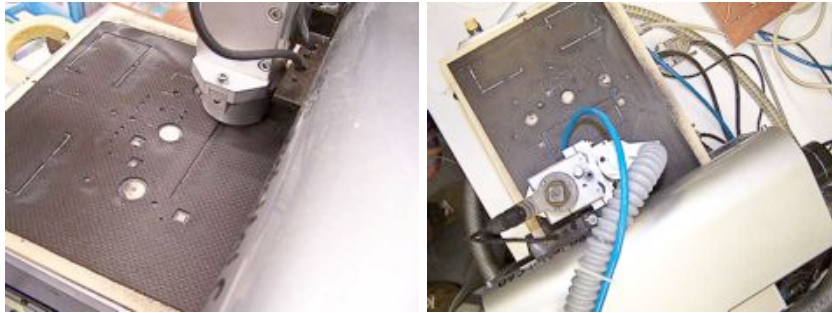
Photograph of carbon fibre plate being milled with a PCB milling machine.
